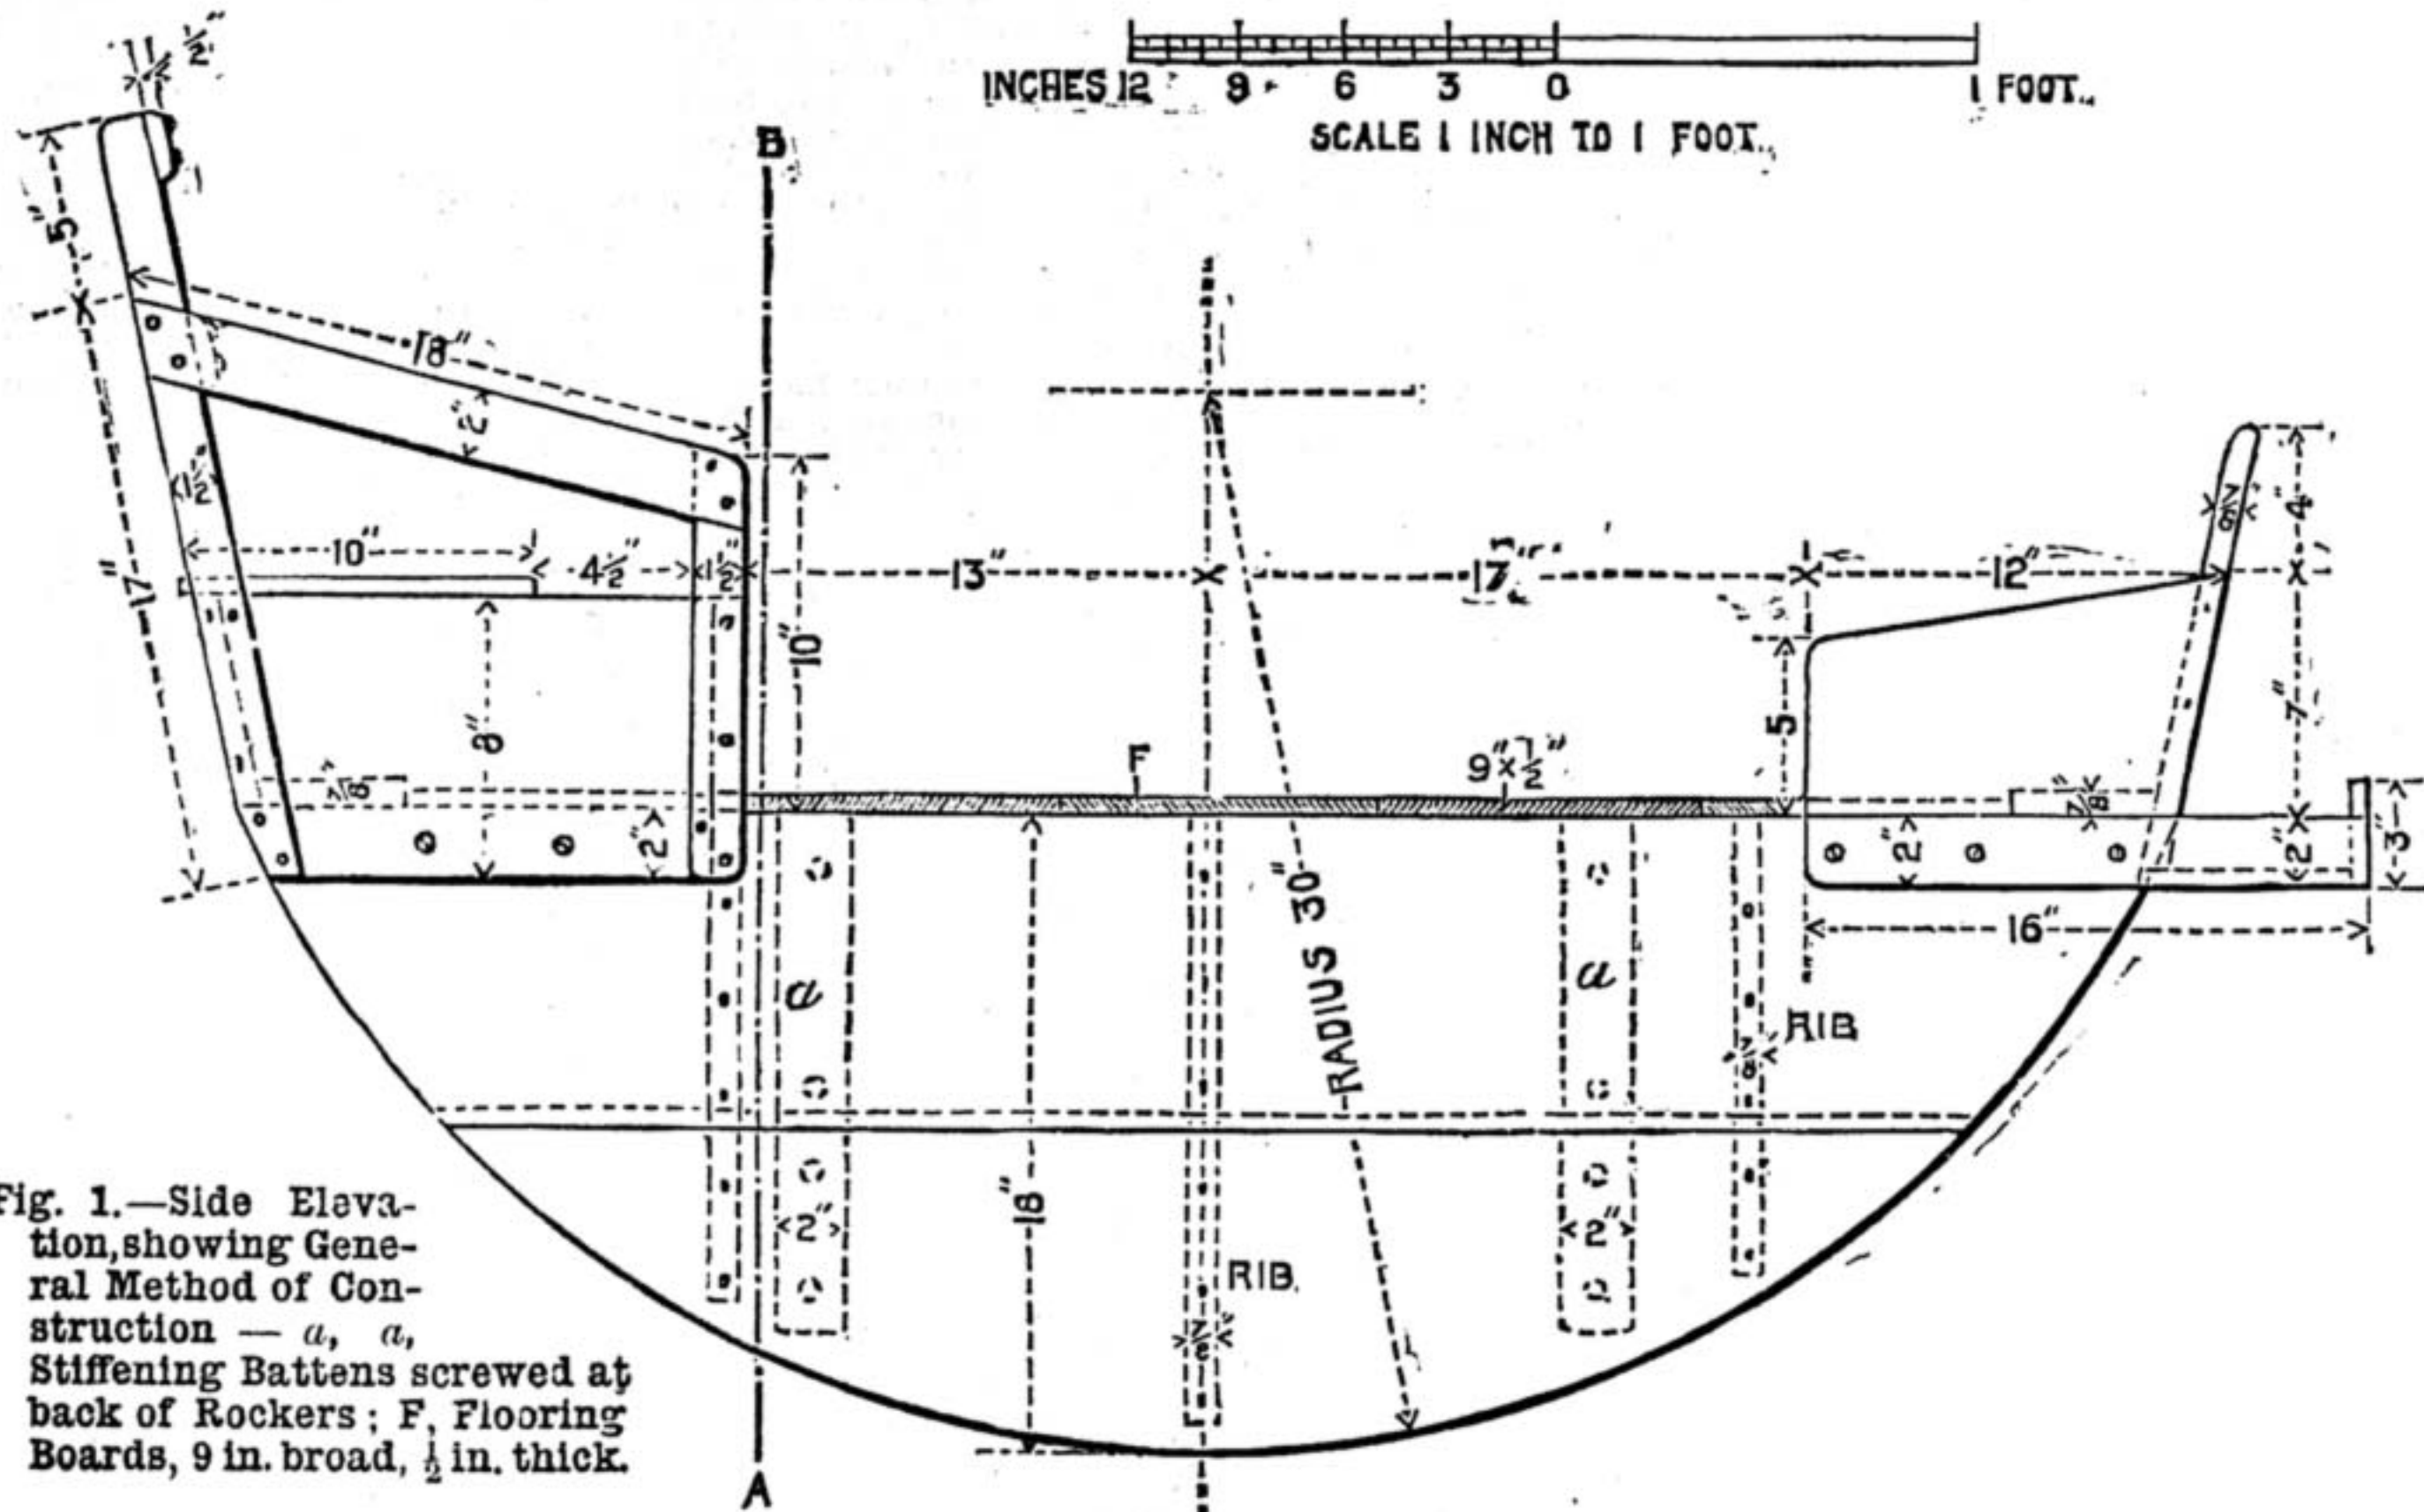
Side Elevation, showing General Method of Construction — *a, a*, Stiffening Battens screwed at back of Rockers; *F*, Flooring Boards, 9 in. broad, $\frac{1}{2}$ in. thick.
